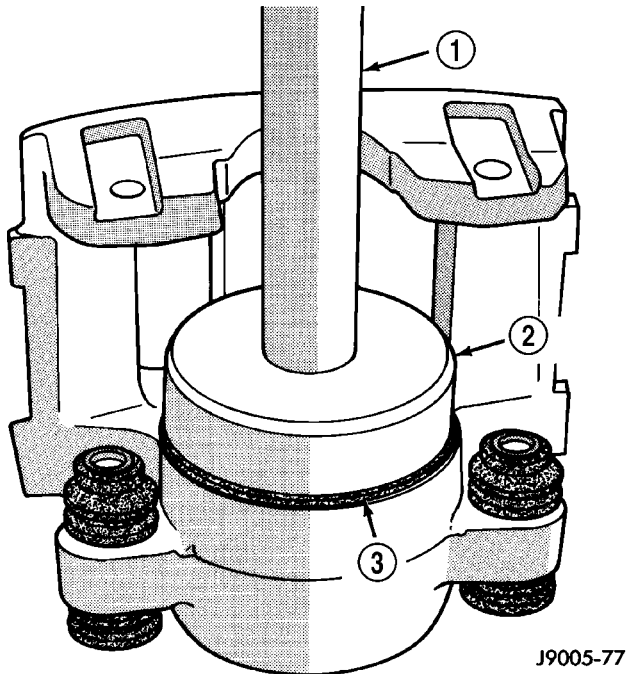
PISTON DUST BOOT INSTALLATION - TYPICAL
